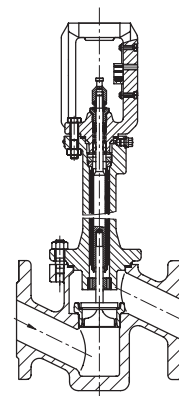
Type 3241 Valve, forged steel version, DN 15 to 80, with bellows seal
